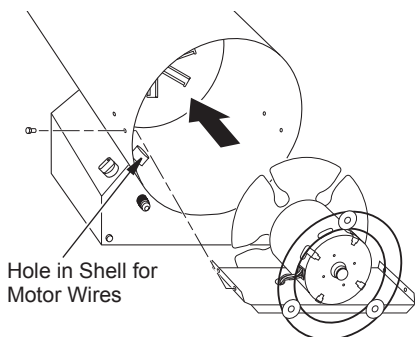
Replacing Motor, Motor Mount, and Fan Guard into Heater
